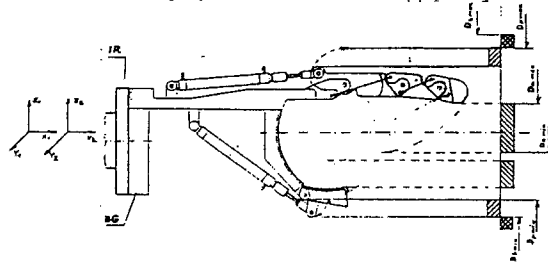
Line drawing of the Prešov Biomechanical Robot Gripper
